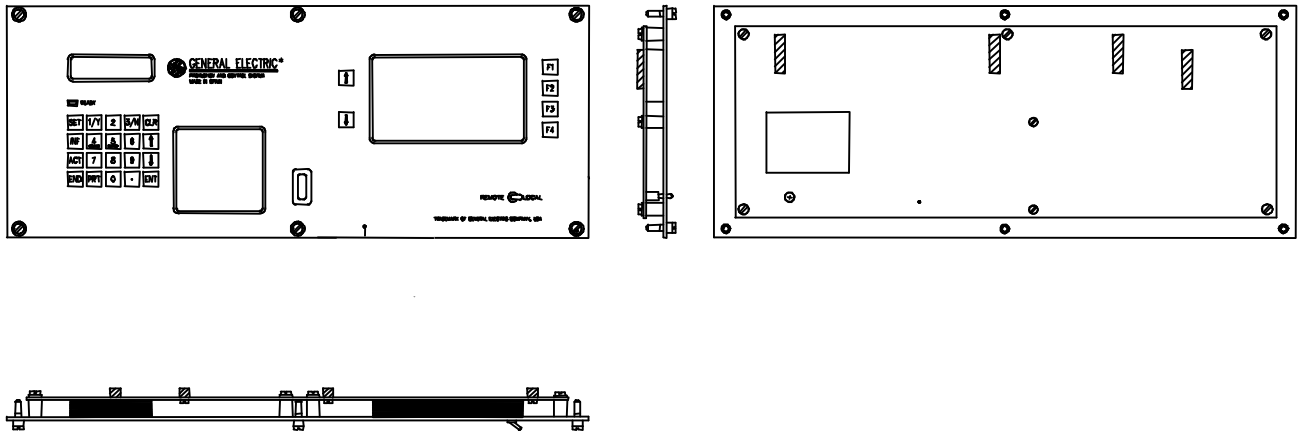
Frontal assembly (226B3351 Fig 1)
